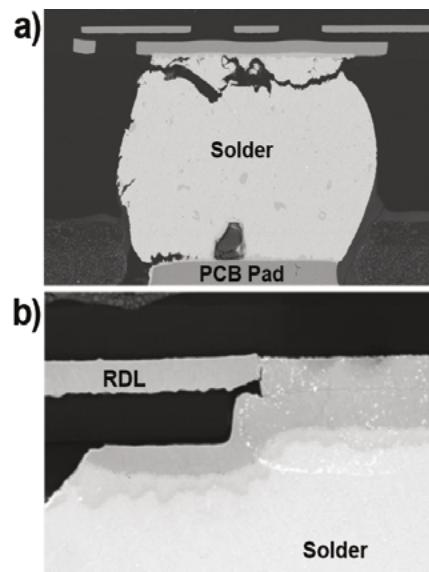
Common board-level reliability testing failure modes in wafer-level packages: a) normal solder joint cracking at package or PCB interface; and b) package RDL trace cracking with stiffer solder alloy.
